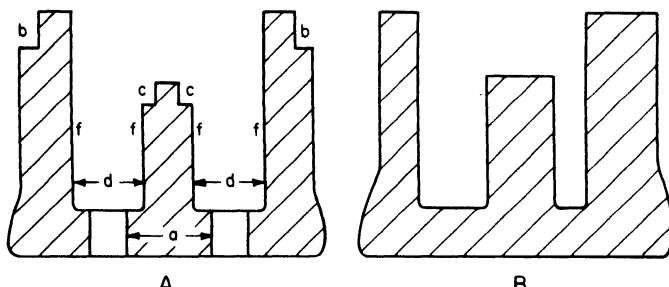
If a casting comes out of the mold somewhat in the shape indicated in (B) it cannot be finish machined to the dimensions shown in (A).
